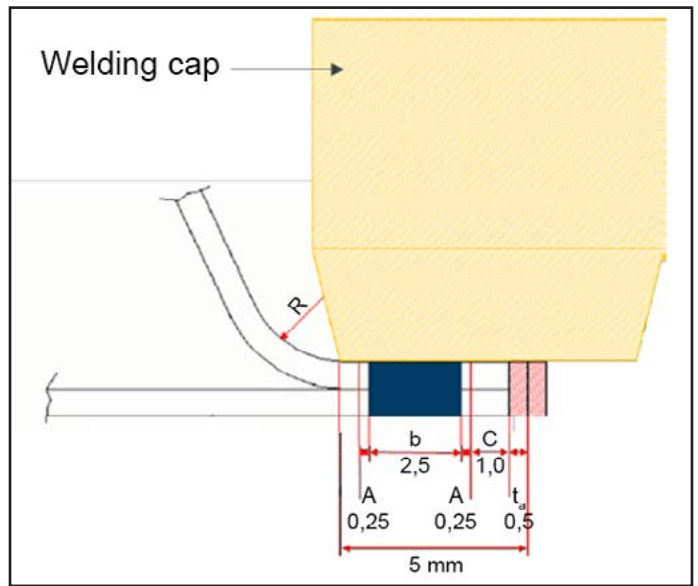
Schematic diagram of the projection welding of the window frame: A – robot tolerance range assuming the invariable location of the projection, C – minimum distance between the projection and the edge of sheets, b – projection width, R – radius, ta – dimensional tolerance of the sheet
